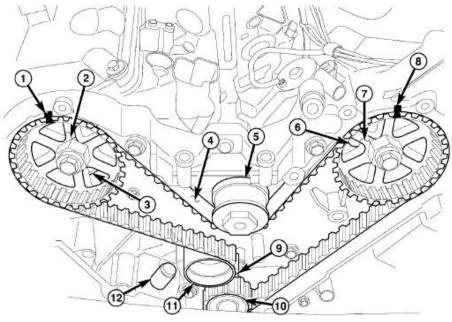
Timing Gear Components Courtesy of CHRYSLER LLC
